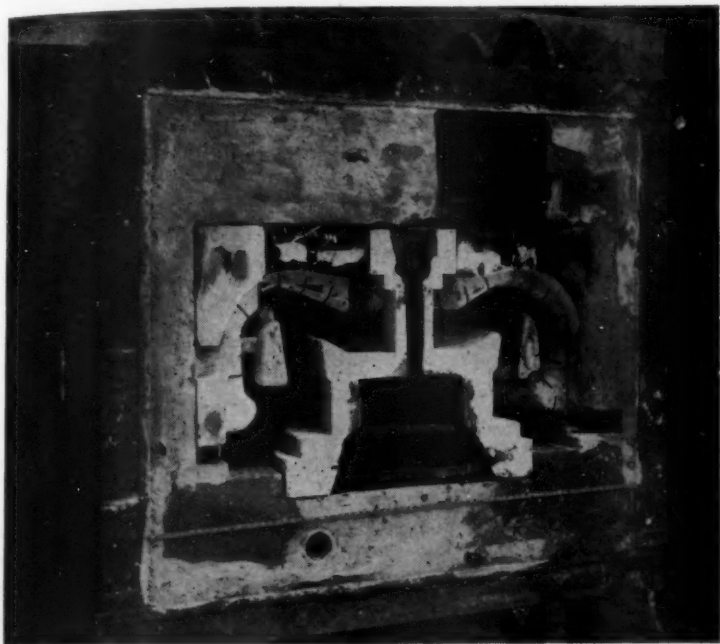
SHOWING HOW CORE IN FIG. 5 IS PLACED IN THE MOLD.
